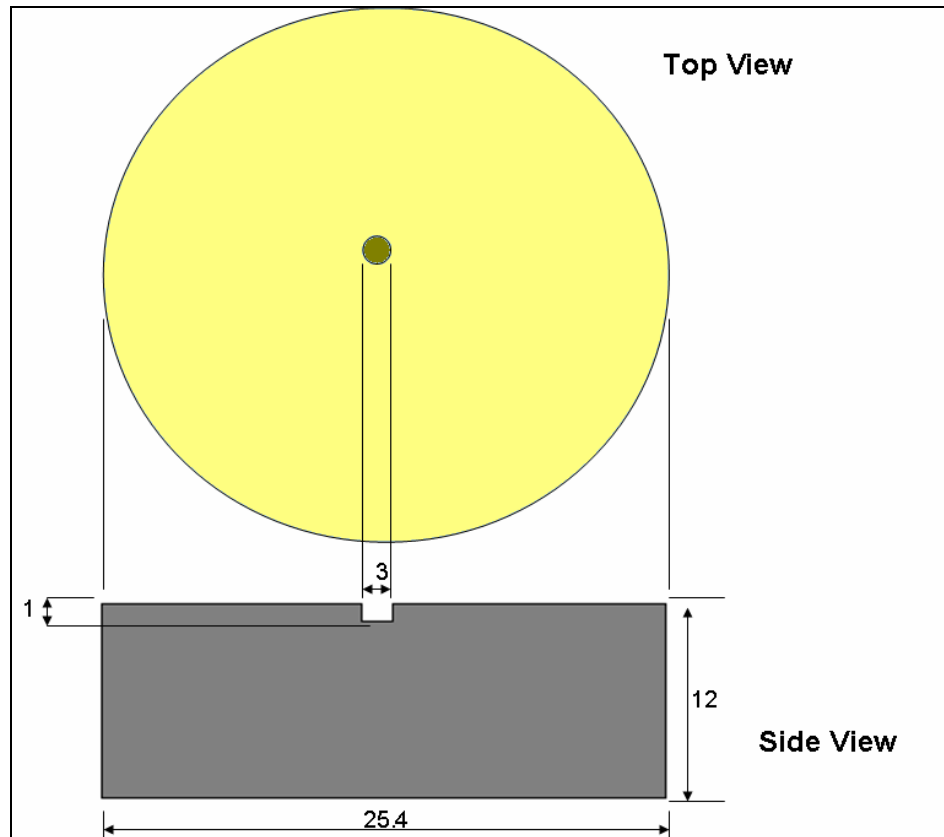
Sample holder design. Manufacturing material is brass. Units are in millimeters.
